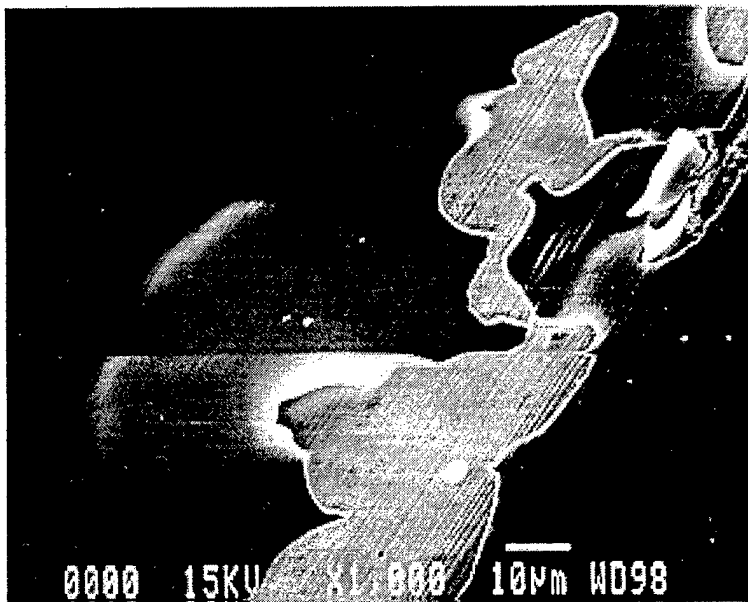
View of Inner Race With Damaged DLC Coating, 1000x Mag.
